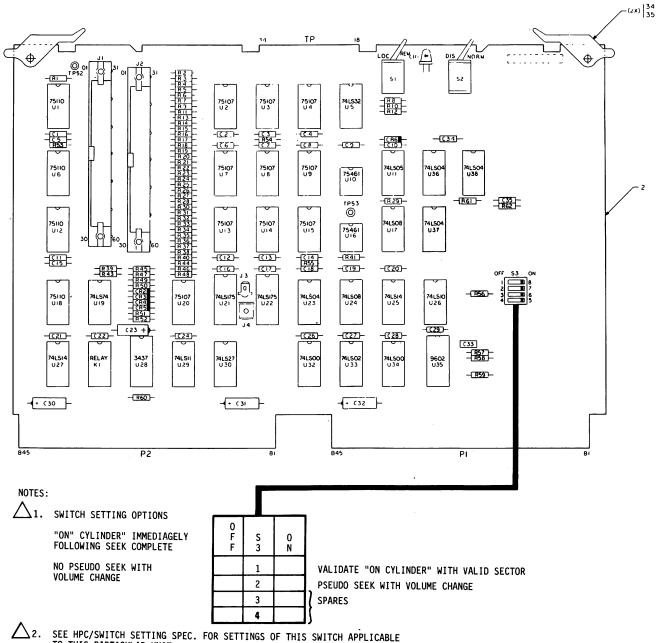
I/O CKT BOARD (SHEET 6 OF 9)
